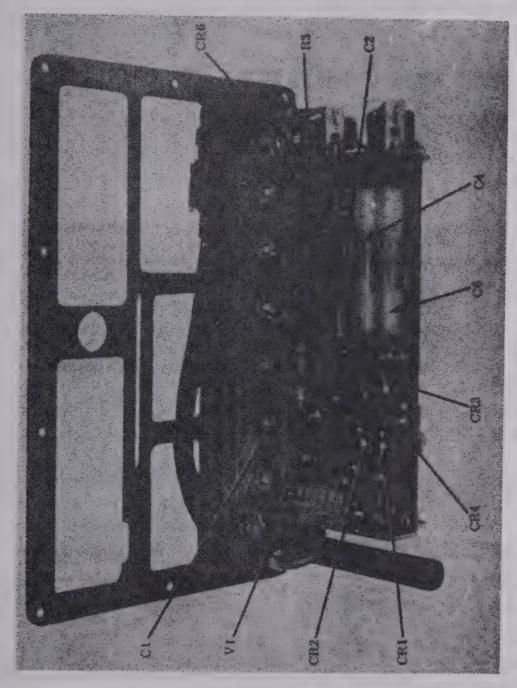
KA-3 Keyer Adapter electronics chassis, bettom view.
